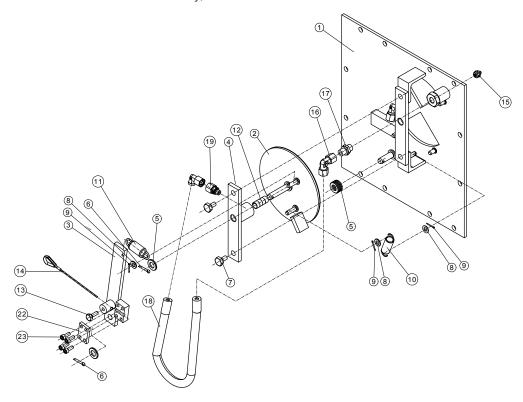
613861 Cover Assembly, MiddleACL / VES ACL
